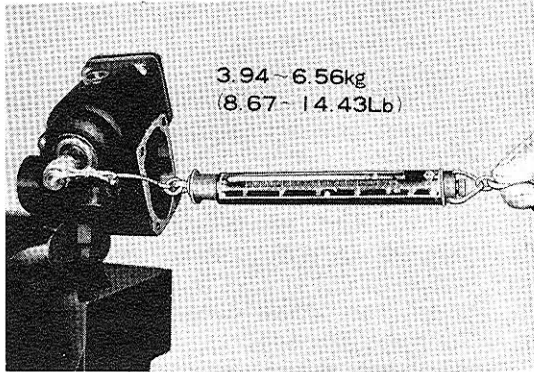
Checking Worm V5155 Bearing Pre-load
